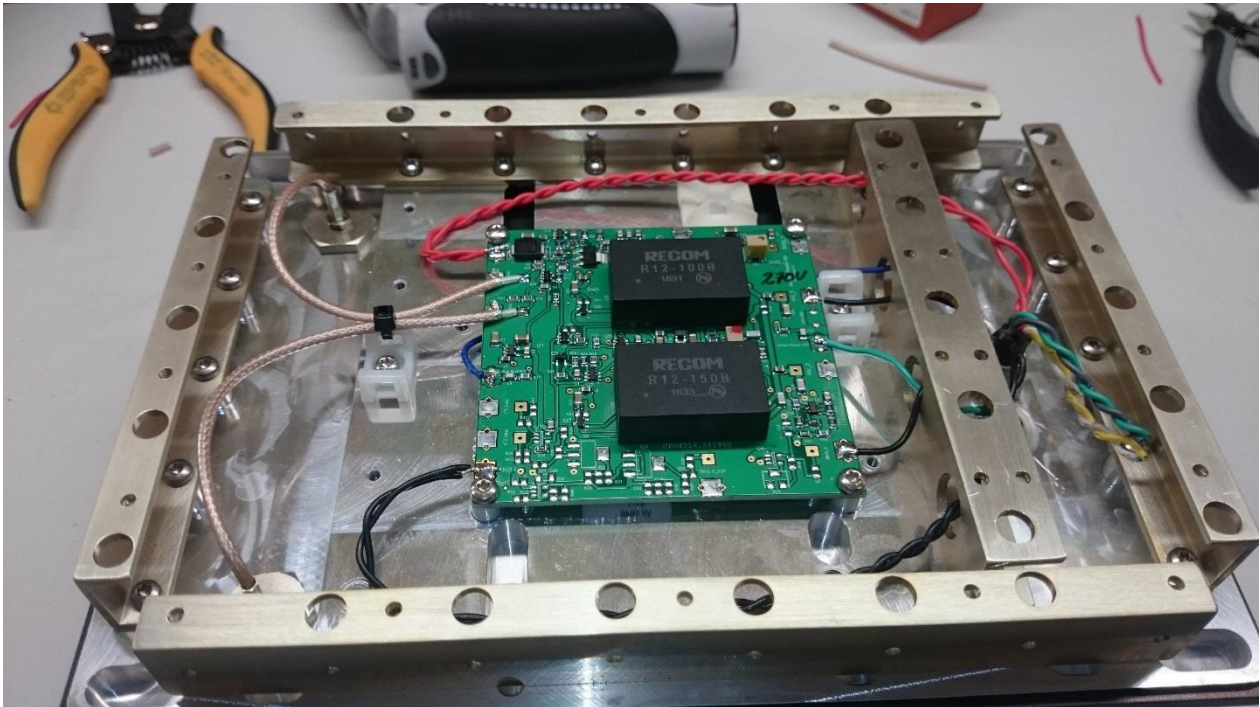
, all metal covers on electronic compartment removed, showing all cabling except the ones feeding the step generator board.
